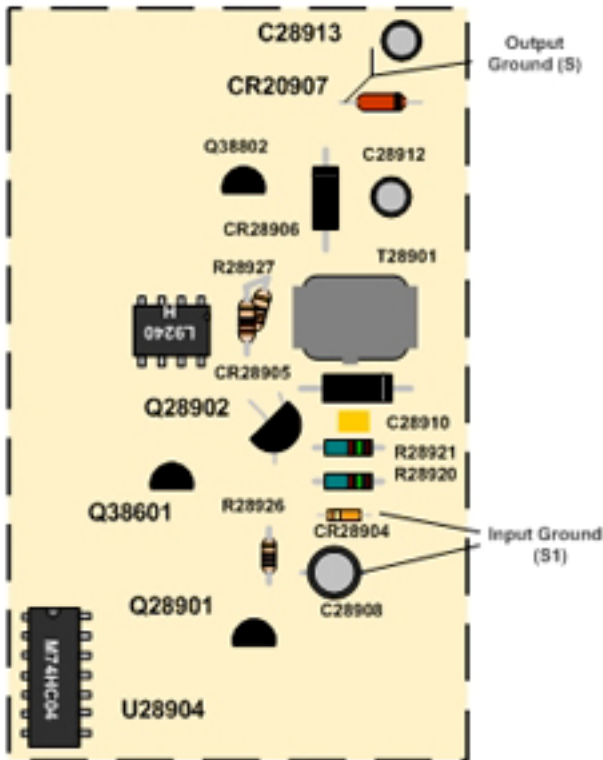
Older CCF-002 Chipper Check circuit board showing power supply component location.
